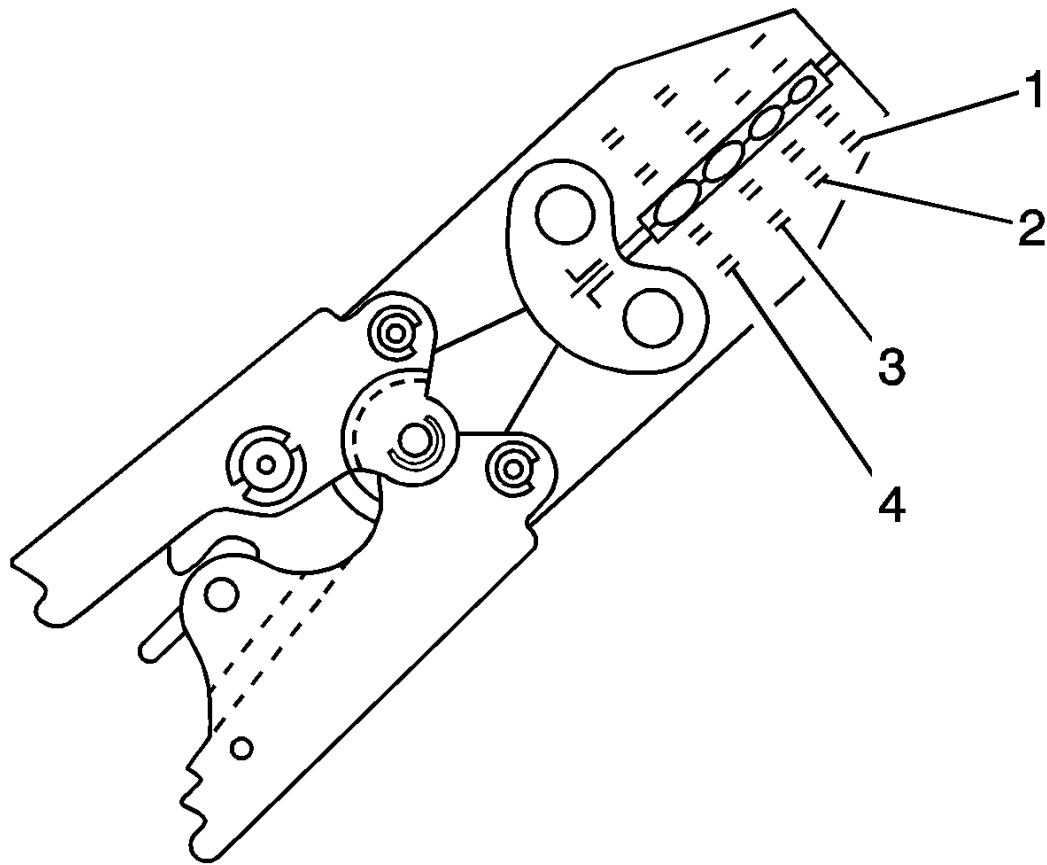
Splice Sleeve Crimping Tool With 4 Crimp Nests
